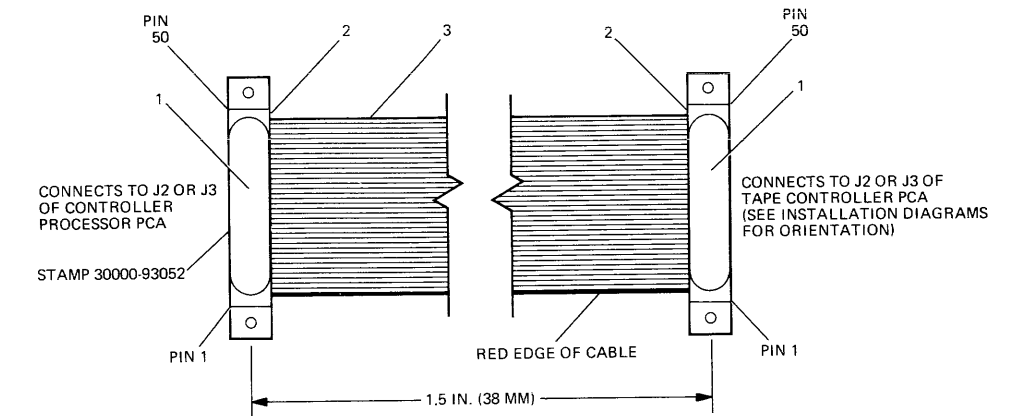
Interface Cable Connectors P2 through P4 Disassembly and Repair Diagram
